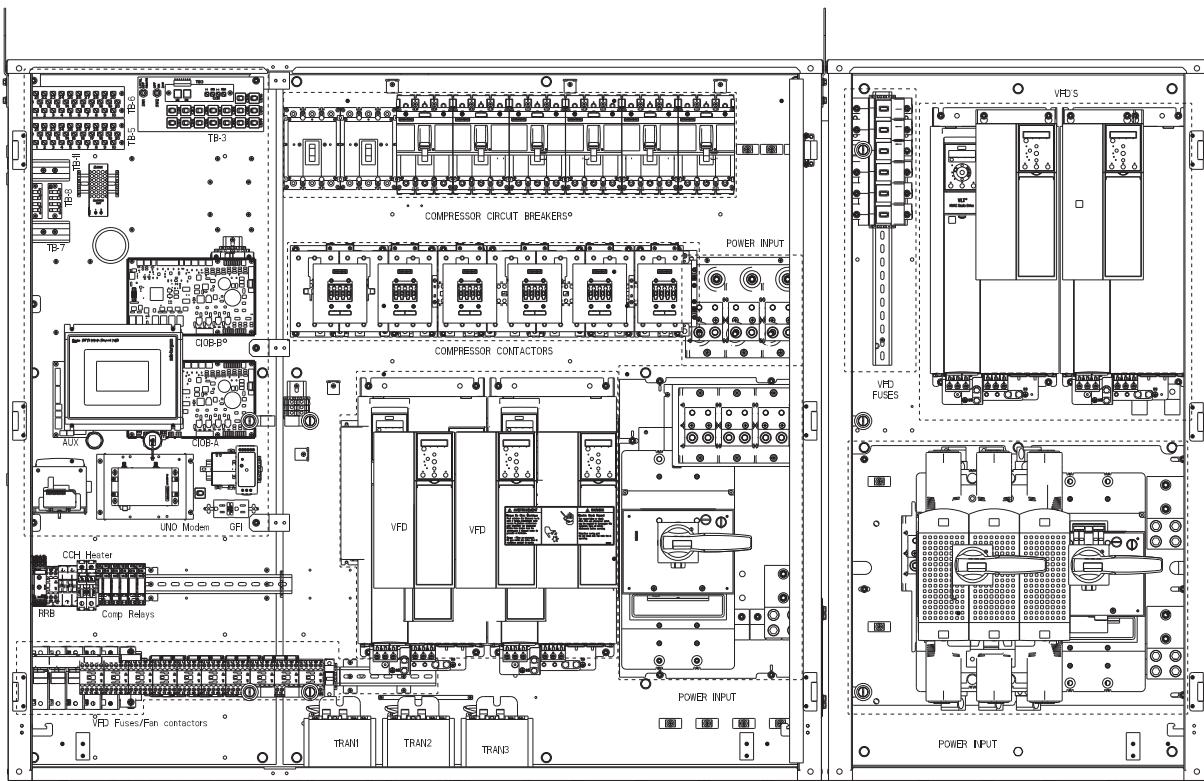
Component Layout Drawing (38RC040-060 – Large Main)
